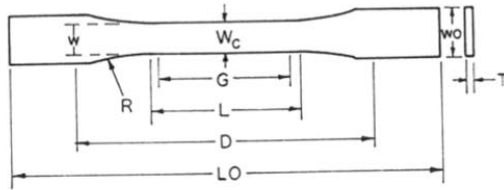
Represents the dimensions of dumbbell shaped tensile specimen
